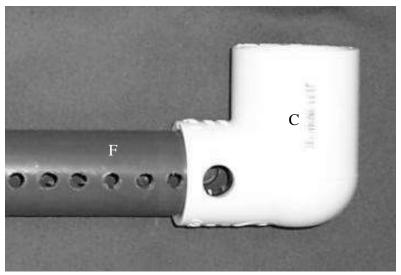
Step 14, 1/2 in Drilled Axle Hole.
